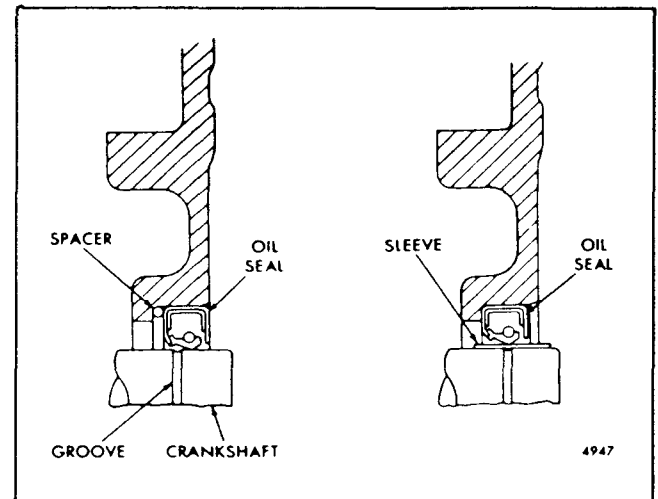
Use of Rear Oil Seal Spacer or Sleeve on Grooved Crankshaft (8V Engines)
